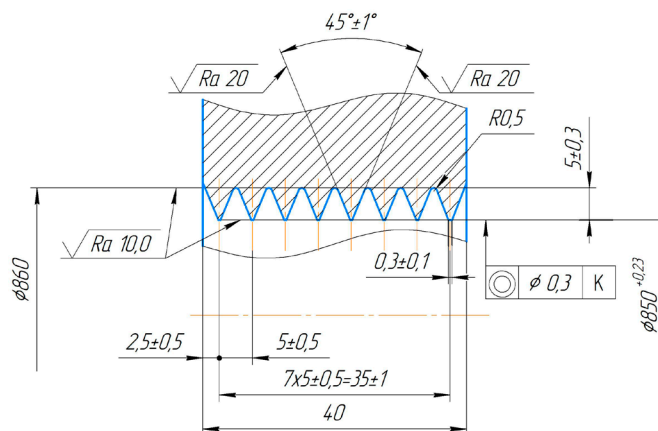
Drawing of the steel rotor seal (view A, Fig. 11)
